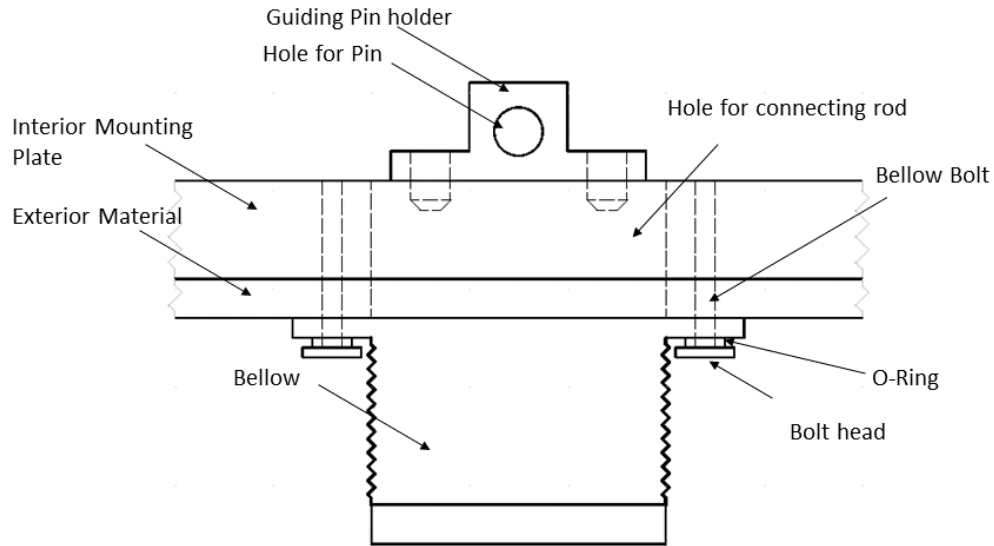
Linkage Side View - Guiding Pin and Bellow Mount Assembly
